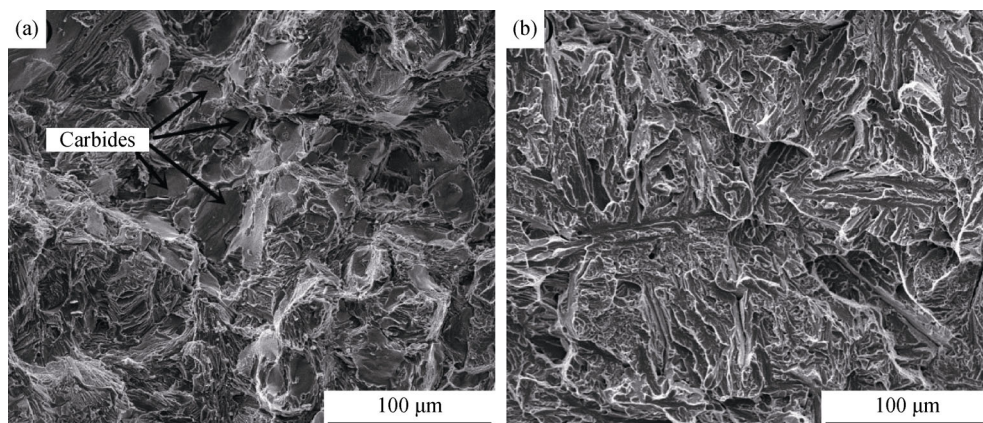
Fracture surfaces of the traditional ingot (a) and ESR ingot (b).
